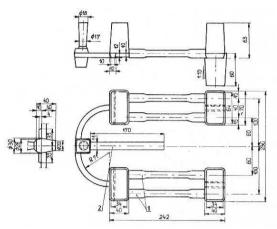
Casting with specimens used in the testing: 1) specimens to strength test, 2) specimens to impact strength [16]
